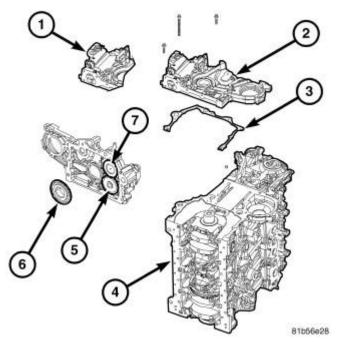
Vacuum Pump And Oil Pump Courtesy of CHRYSLER LLC
